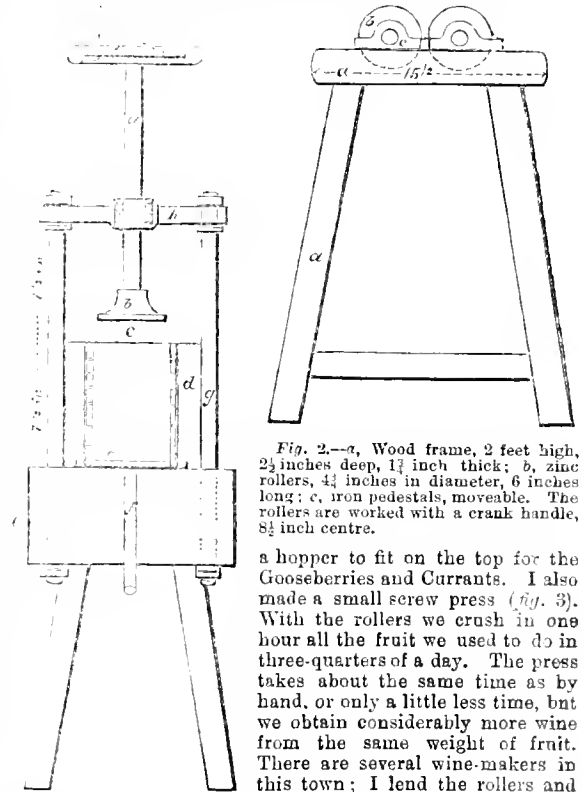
a, Wood frame, 2 feet high, 2 1/2 inches deep, 1 1/2 inch thick; b, zinc rollers, 4 1/2 inches in diameter, 6 inches long; c, iron pedestals, moveable. The rollers are worked with a crank handle, 8 1/2 inch centre.
